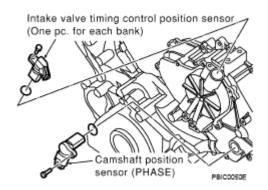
Identifying Intake Valve Timing Control Position Sensor Courtesy of NISSAN MOTOR CO., U.S.A.
